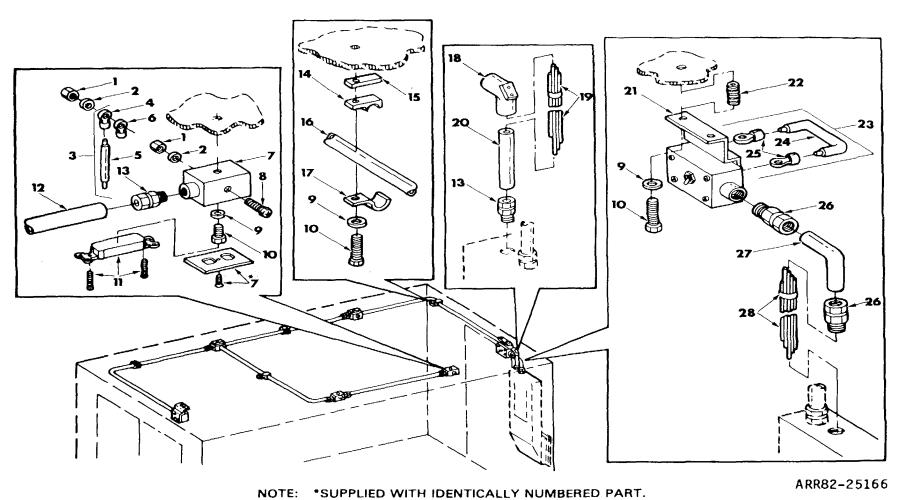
Shop set, armament AVIM 5911163; wire assembly 120116904, switchbox; and wire assembly 12011690-9, ceiling outlets.
